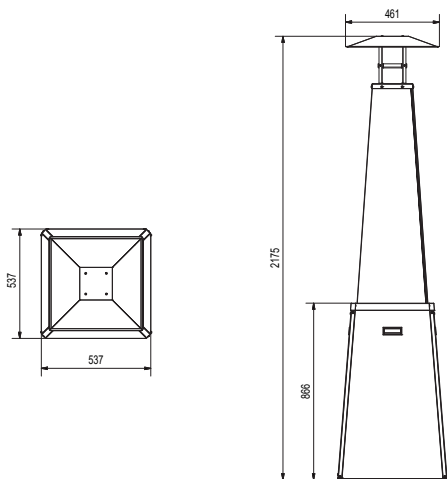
Dimensional drawing of the UMBRELLA/BS versions.
